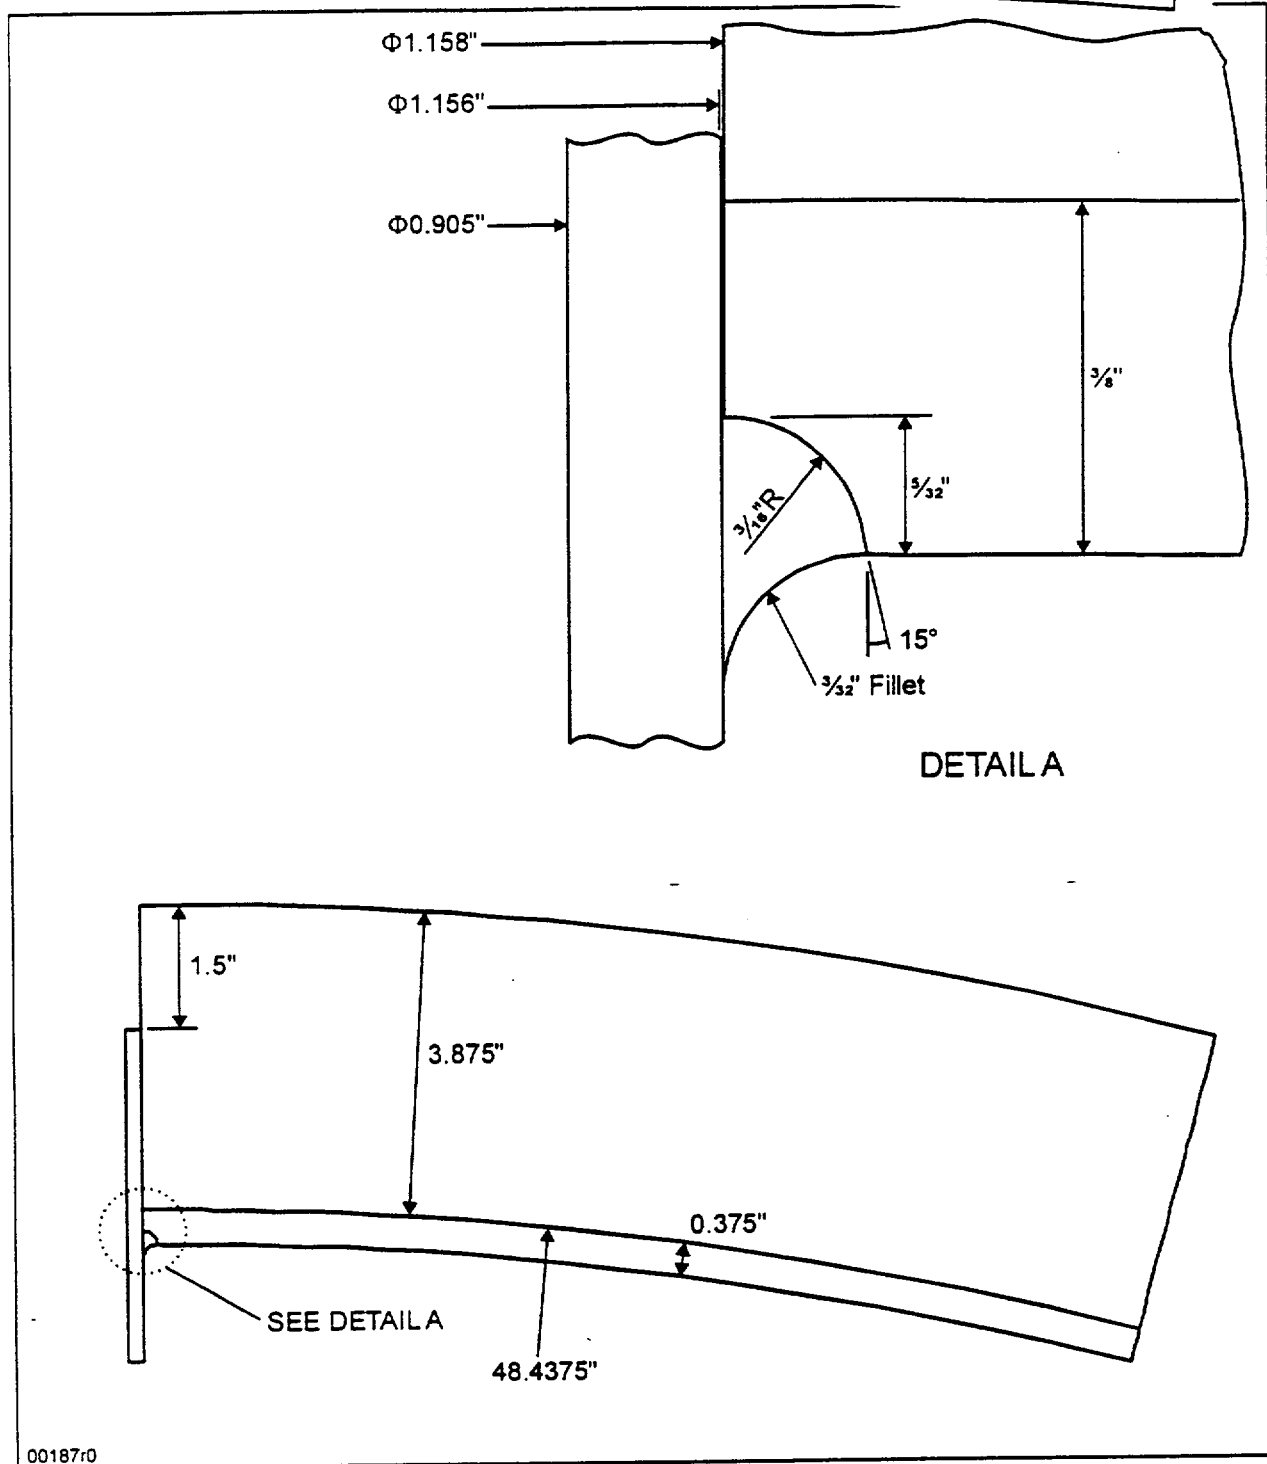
Geometry and Dimensions of Pressurizer Vessel Heater Penetration
